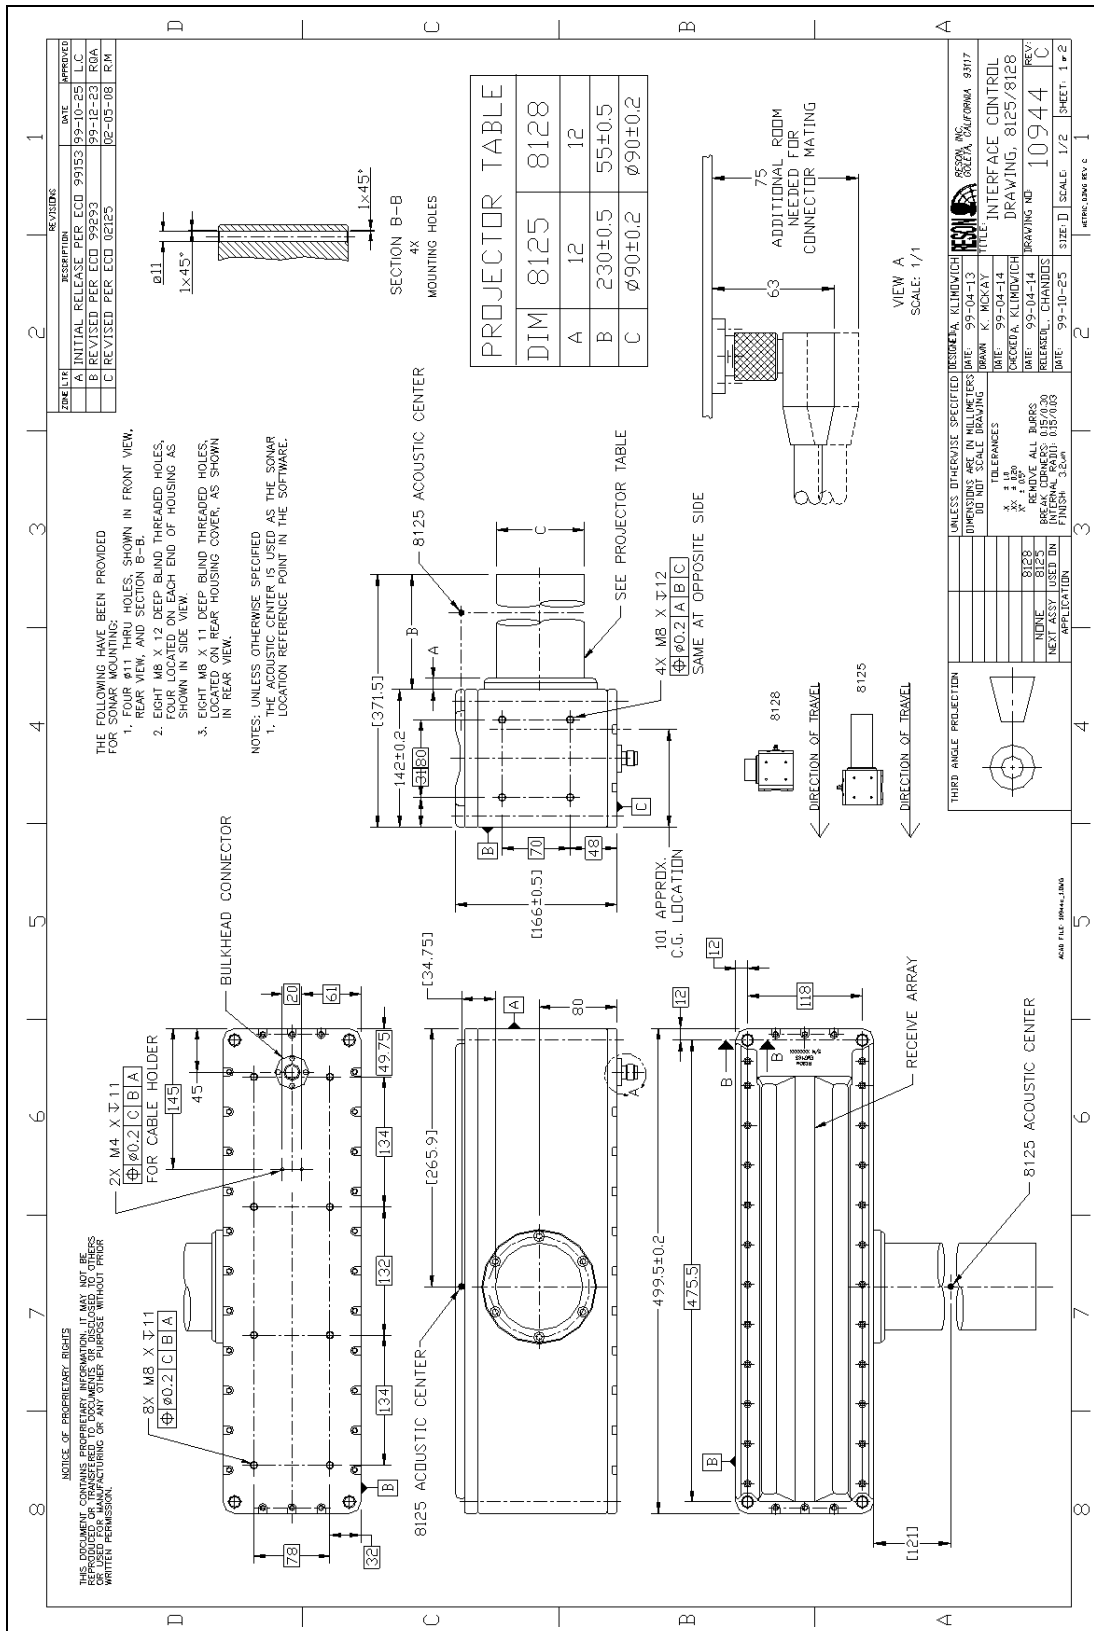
, Interface Control Drawing, 8125/8128, Sheet 1
